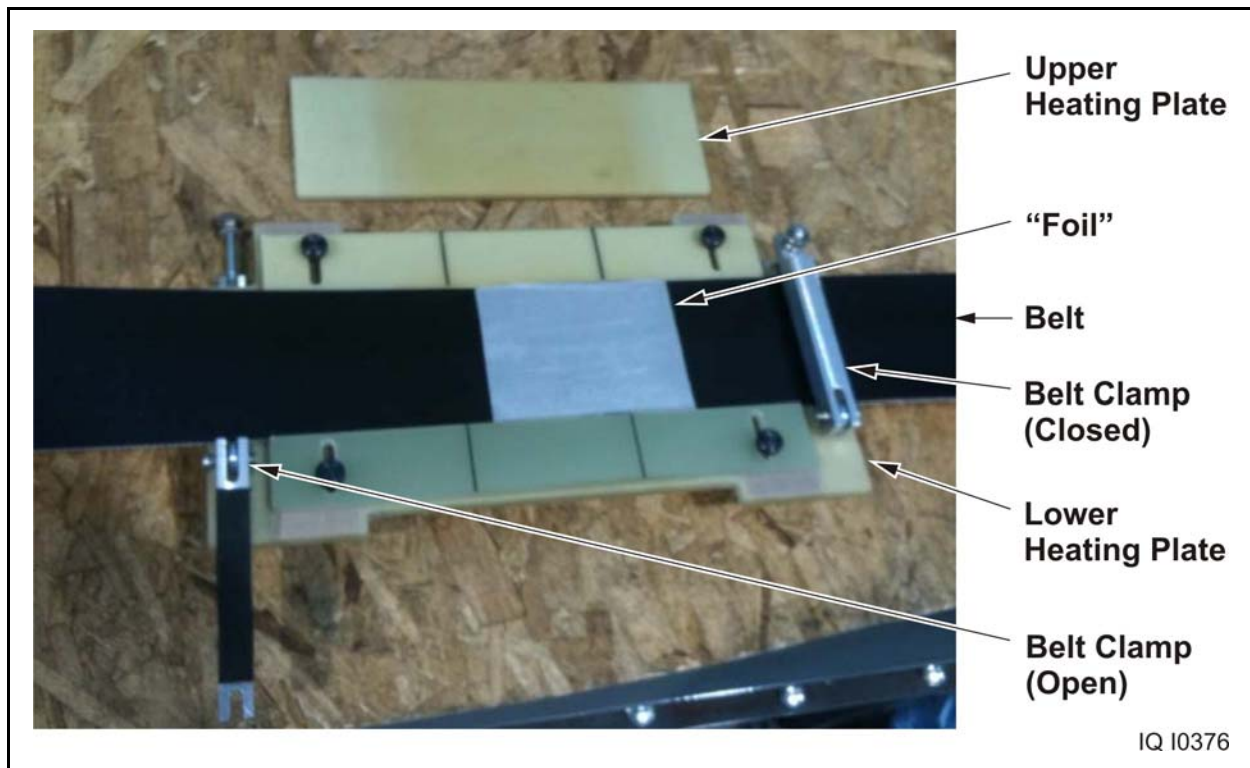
21 Preparing the Belt for Thermal Welding
